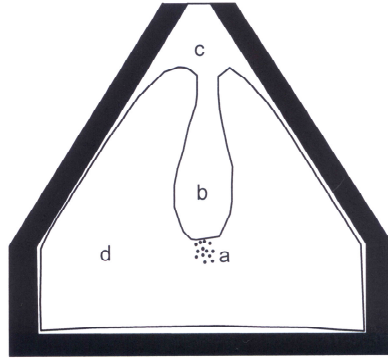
Sketch showing three different types of porosity present in the sample cast in Tatur mould (a) micro-shrinkage cavities, (b) macro-shrinkage pipe, (c) slumping and contraction, and (d) casting.
